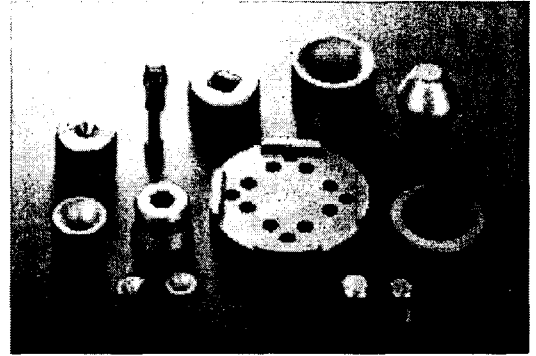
Example of precision deep drawing & extrusion dies using ultra-fine powder type WC-Co alloy
